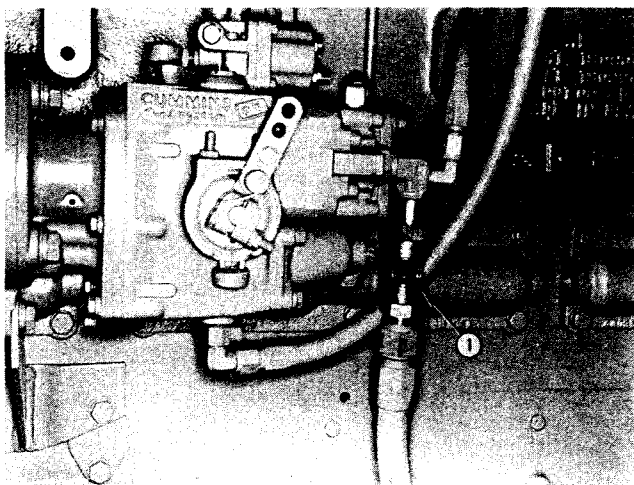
(N11964) Checking air leaks with ST-998 Sight Gauge
